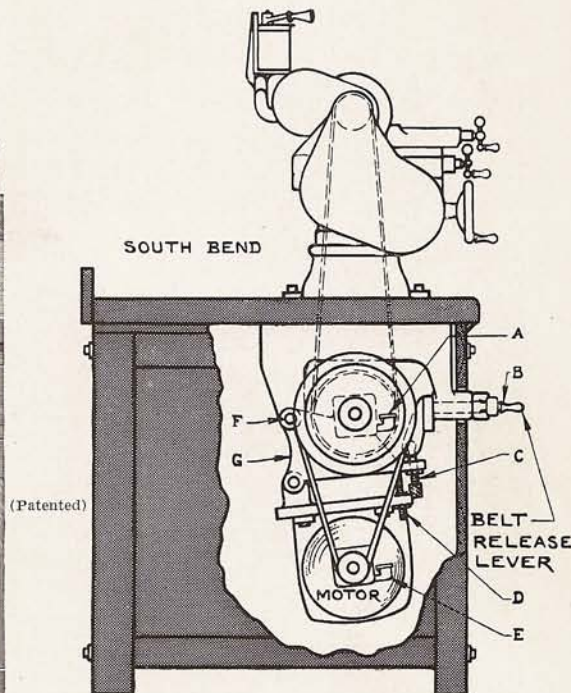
Cross Section End View of Underneath Belt Motor Driven Bench Lathe.
